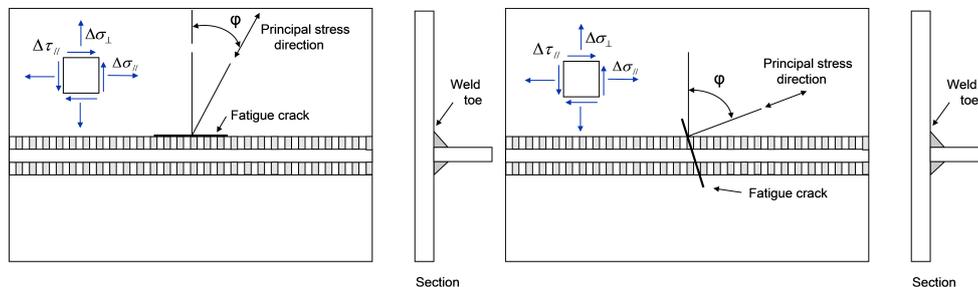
Fatigue cracking pattern when principal stress is approximately perpendicular or parallel to the weld toe line (DNV-CN30.7, 2010).
